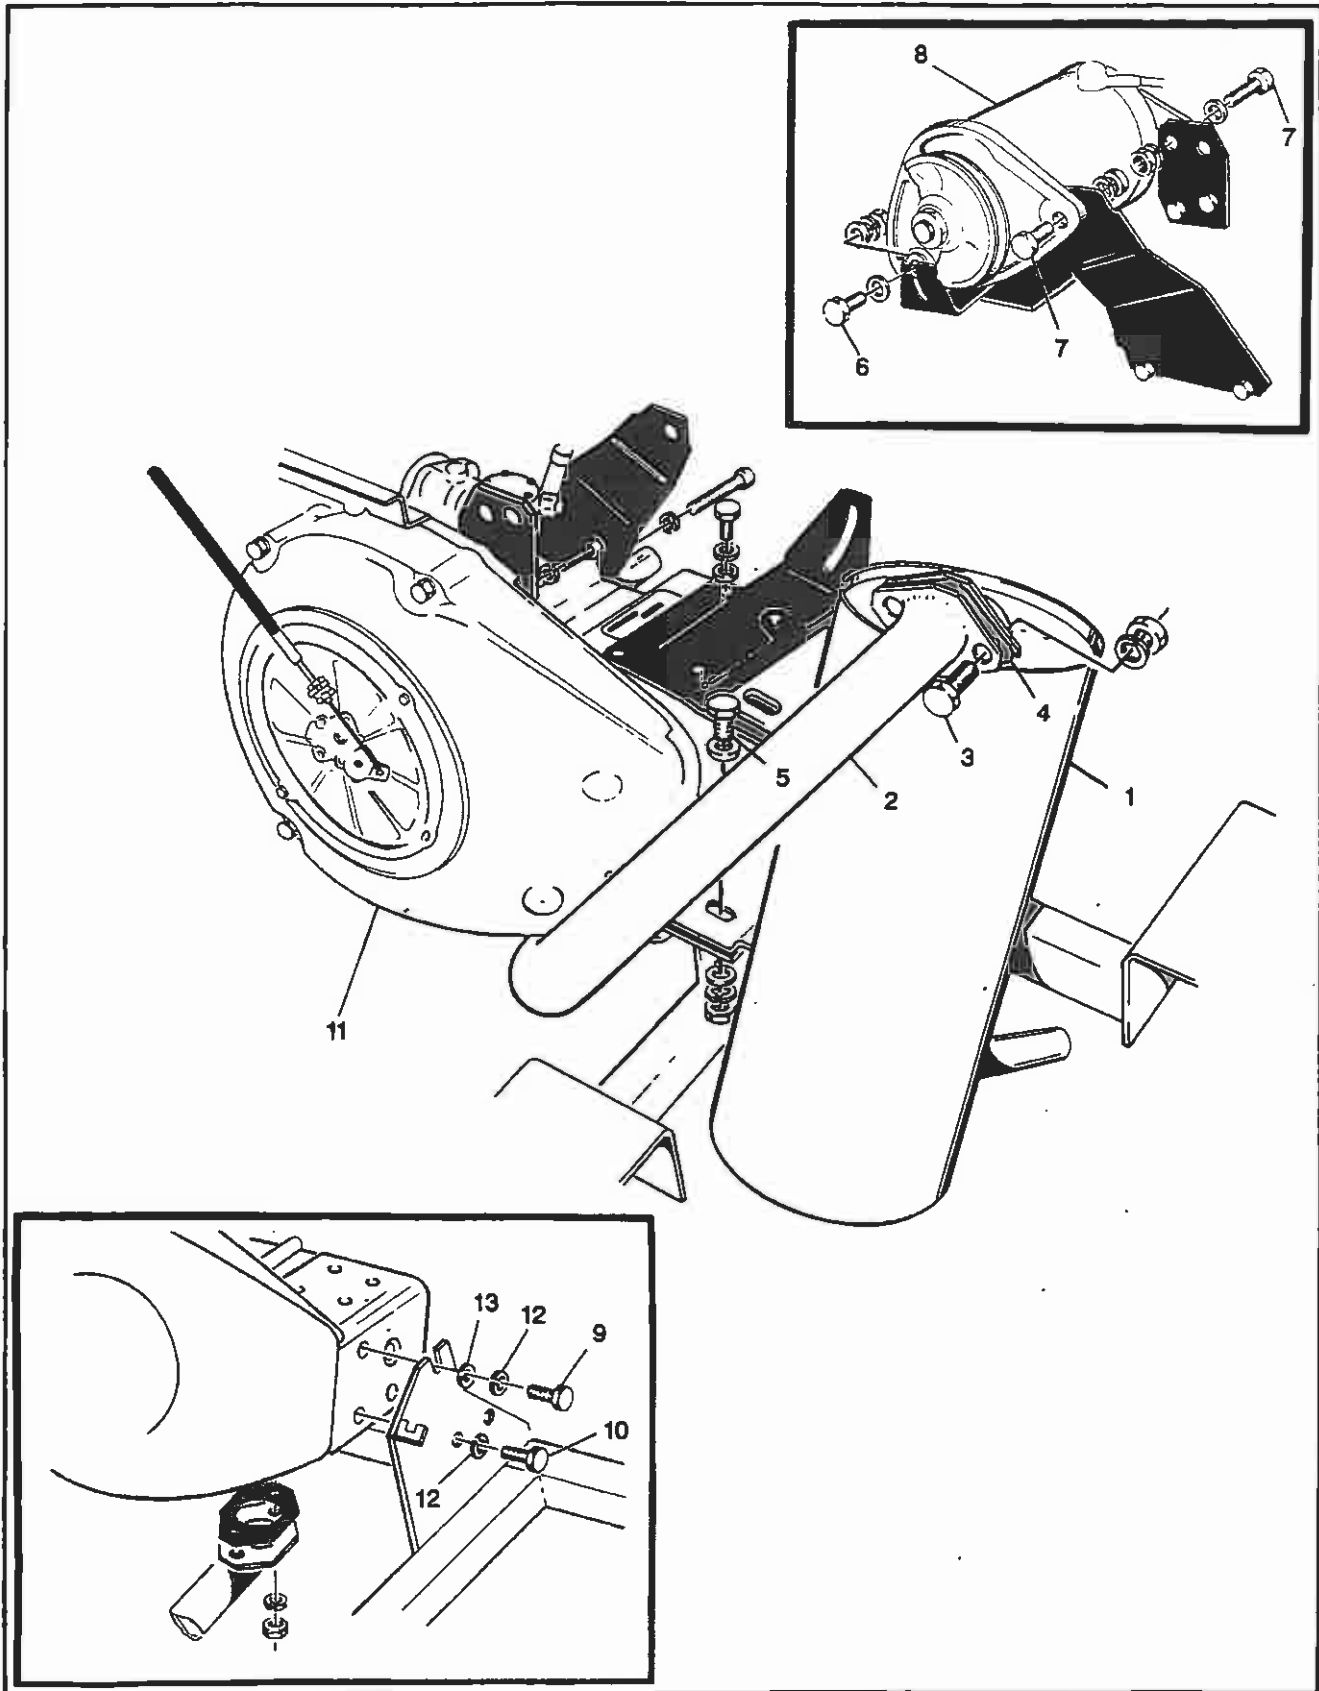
ENGINE AND GENERATOR MOUNTING
